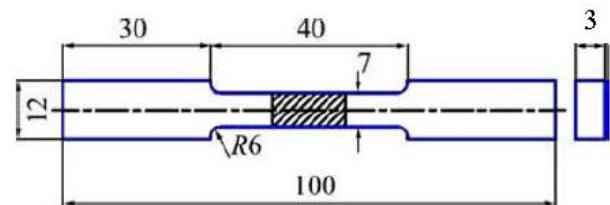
Tension Test Specimen Dimensions ASTM E08 (mm)
